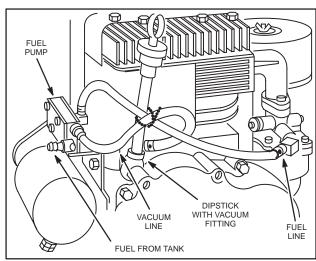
PUMP ON BRACKET, DIPSTICK TUBE VACUUM
